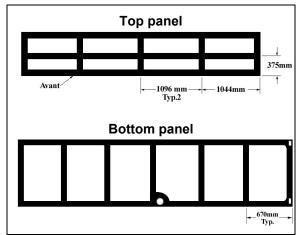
TOP AND BOTTOM PANEL INSTALLATION - SIKA 206 G+P APPLICATION
